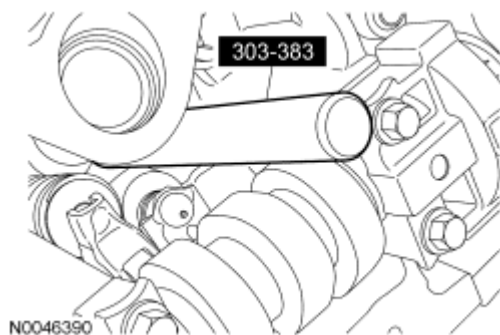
Installing Valve Seal Using Special Tool (303-383)
